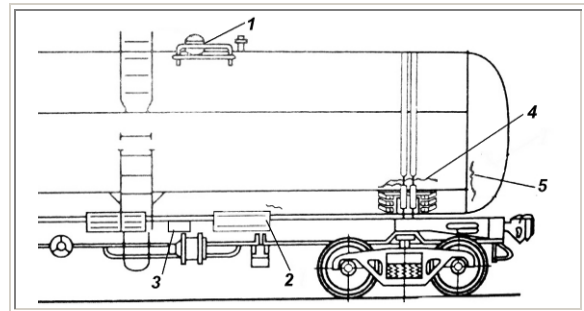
Areas of damages of barrel of tank wagon: 1-welding seams of manhole hatch, 2-welding seams of shaped pads, 3-welding seams of discharging device, 4-welding seams of the barrel shell near supports, 5-welding seams of dome
